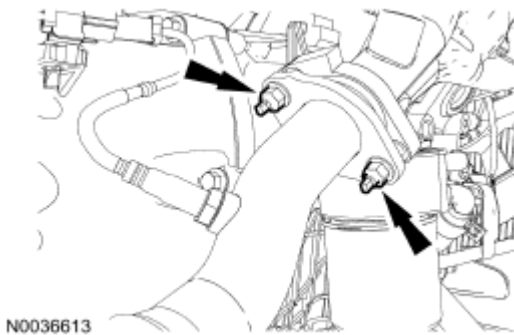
Locating Catalytic Converter-To-RH Exhaust Manifold Nuts
